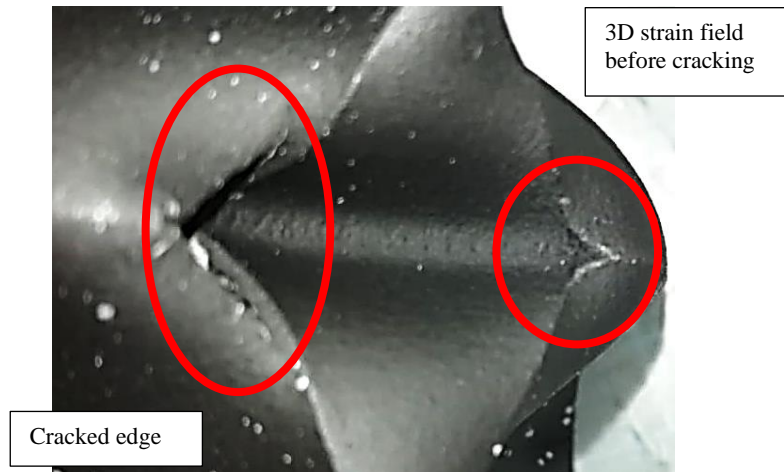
Partially crushed module of the SUS316L 1.58 mm thick specimen
